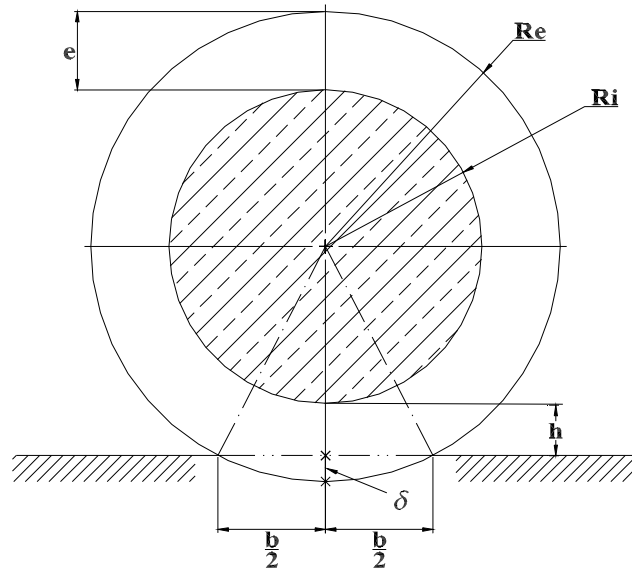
Geometry of the Wheel in the Roller Guide
